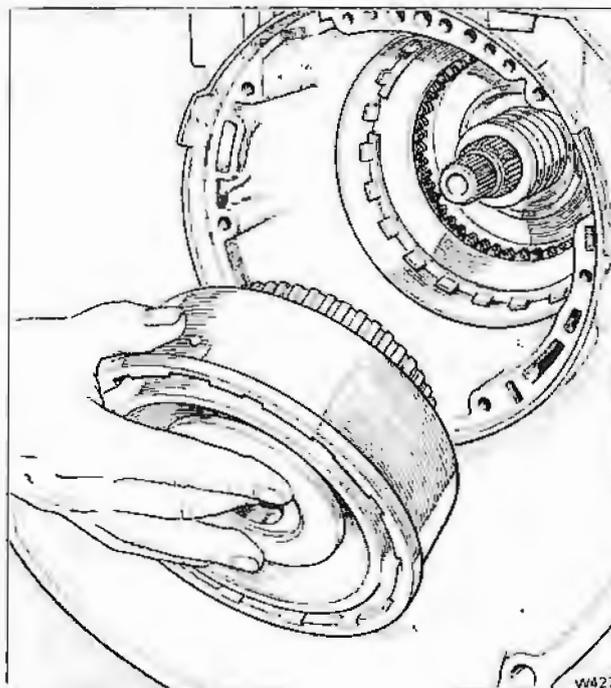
Removing the direct clutch and intermediate sprag assembly
